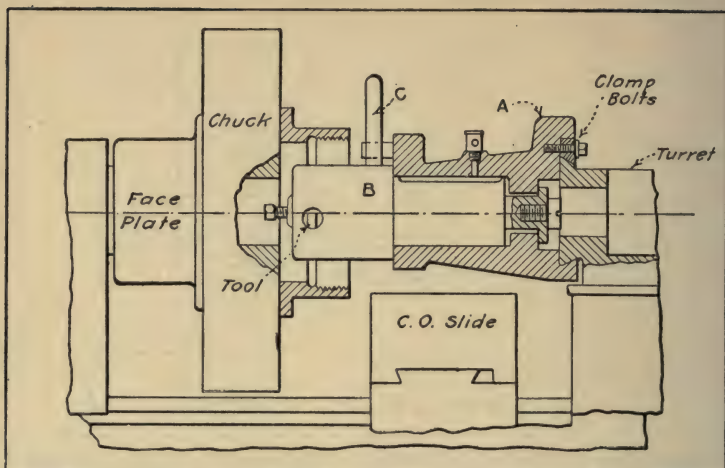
SIMPLE RECESSING TOOL FOR TURRET LATHE WORK
